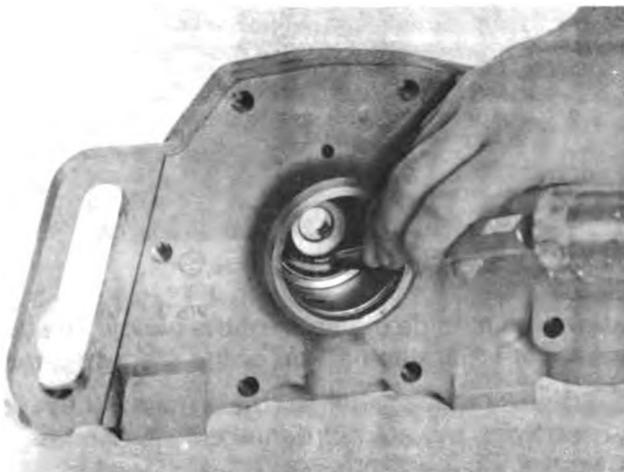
(N10878). Remove The Seal From The Housing.
